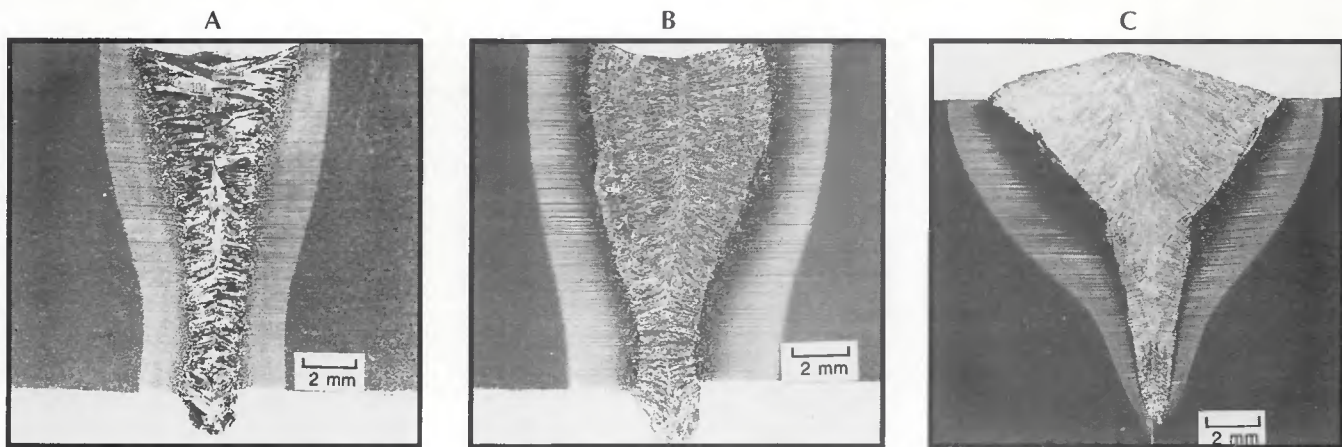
Comparison of weld bead profiles for laser butt joint welds in 13-mm-thick HY80. A — Autogenous; B — hot welding wire addition at 145 mm/s; C — hot welding wire addition at 425 mm/s.
